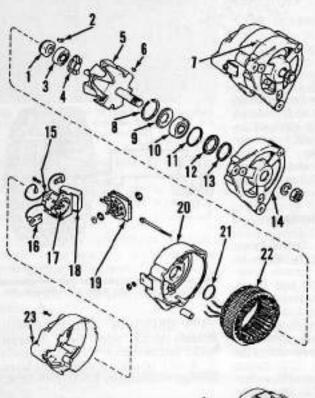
Exploded view of standard duty Lucas alternator showing component parts and their relative posi-
